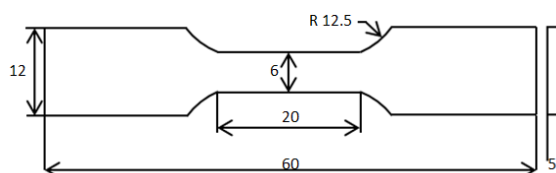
The schematic of tensile specimen (Dimensions in mm)
